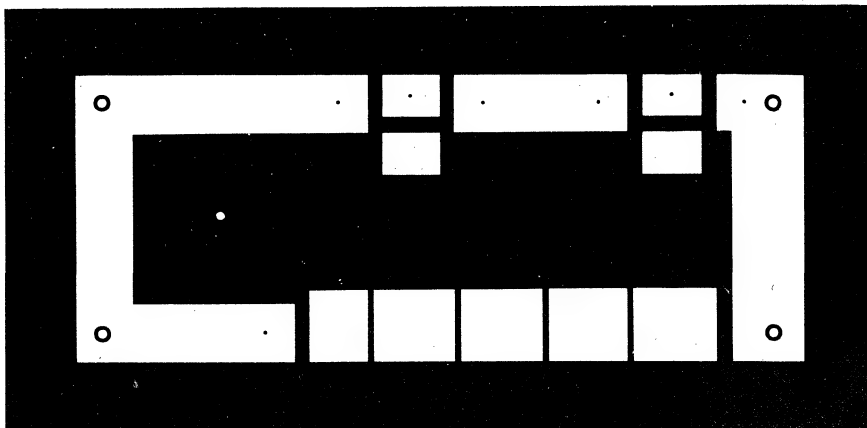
Circuit Board Layout of the Power Combiner Assembly
